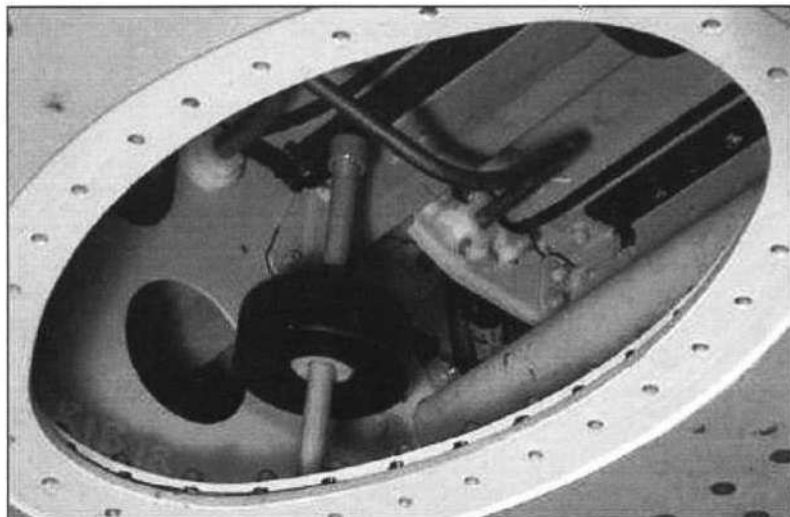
View inside a fuel tank through an open tank access Access Panel Installation
